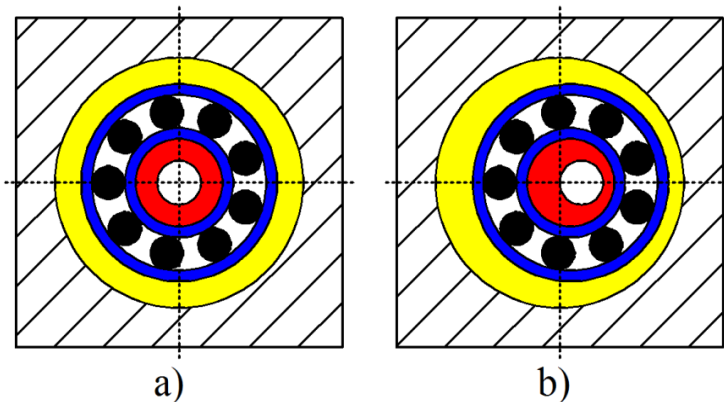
Scheme of the bearings to achieve the mixed eccentricity failure. A) Bearing with concentric bearing houses b) Bearing with eccentric bearing houses
